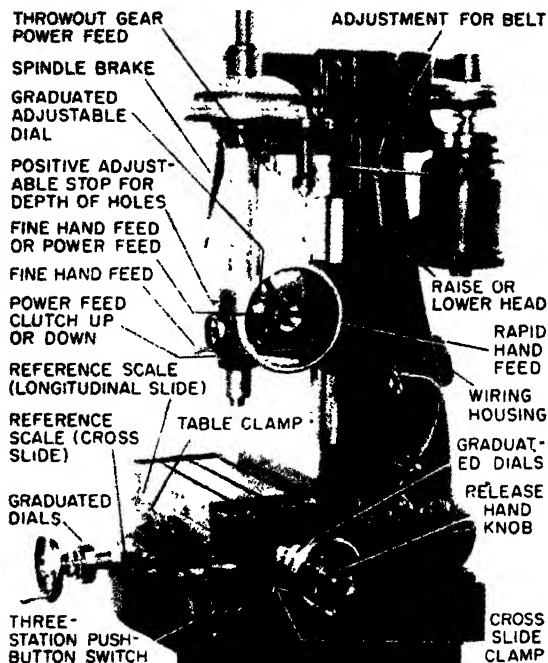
Operating parts of the jig borer. (The Moore Special Tool Company)
